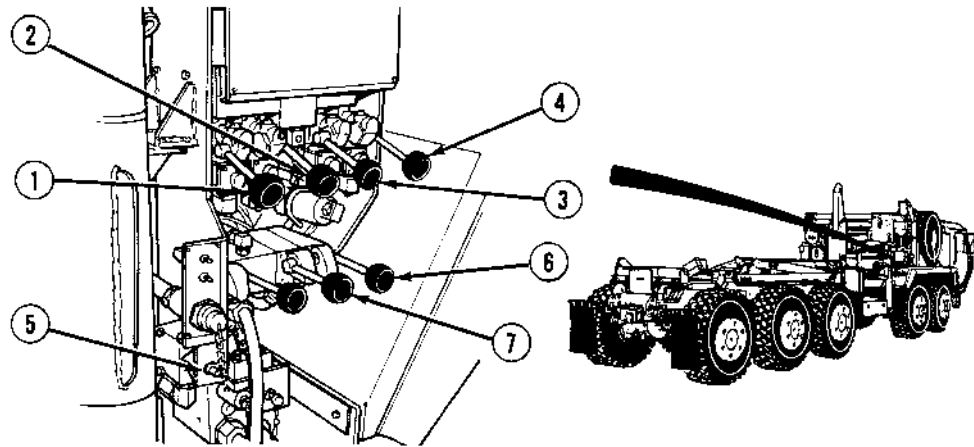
Right Hand Crane and Outrigger Jack Control Panel
